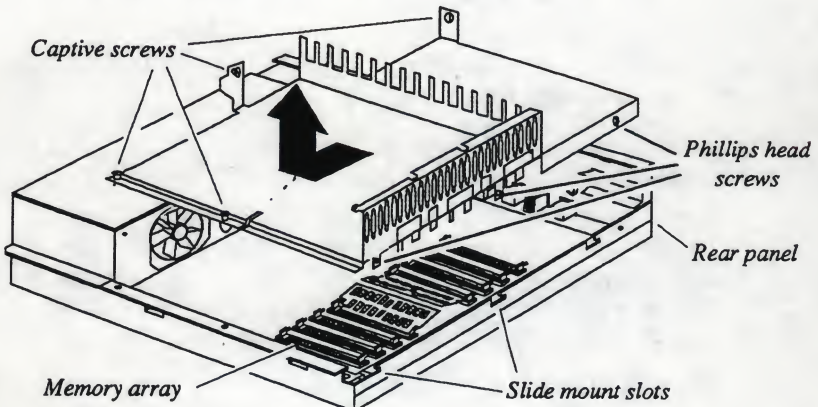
Removing the Lower Disk Drive Mounting Plate
